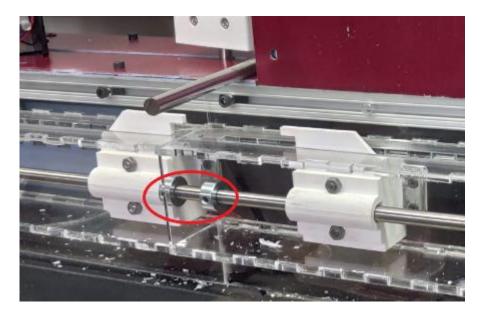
Shaft collars (circled in red) restricted the movement of the pusher assembly.
